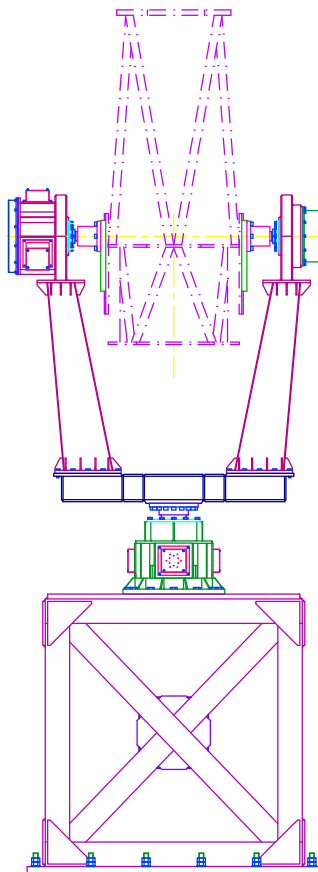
Assembly drawing of the MASS-DIMM telescope in Alt/Az mount scheme. Left end of the Elevation axis is the drive end consisting of motor. Right end is the non-drive end, and consists of the encoder and brake.
